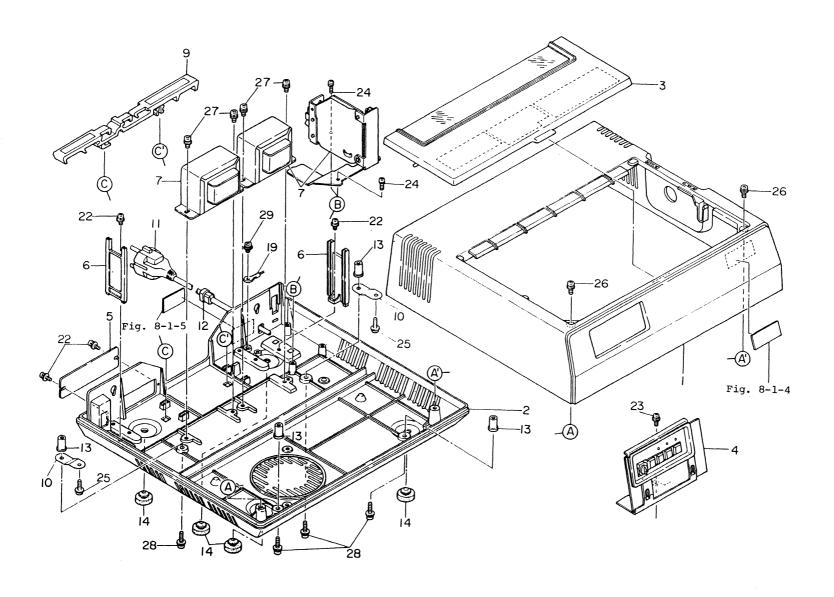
Cover Unit (1LM-61521-3) (for 220/240 V)
